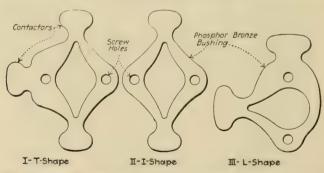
Illustrating different shapes of rotating-blade snap-switch movable contactors.
